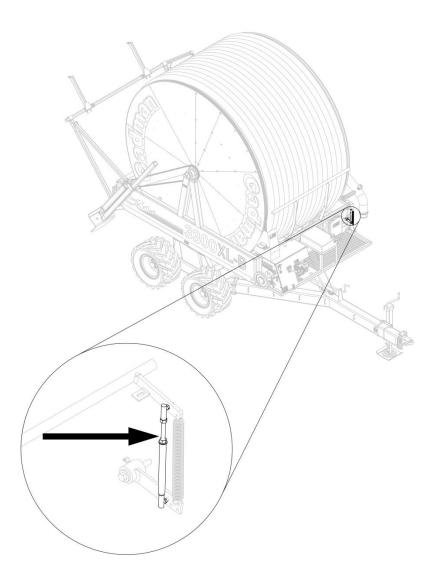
4000 and 5000 Series Compensator Cable Adjustment
